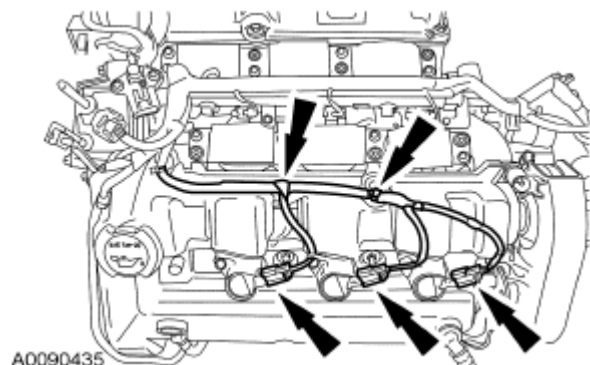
Locating Coil-On-Plug Electrical Connectors & Wiring Retainers
